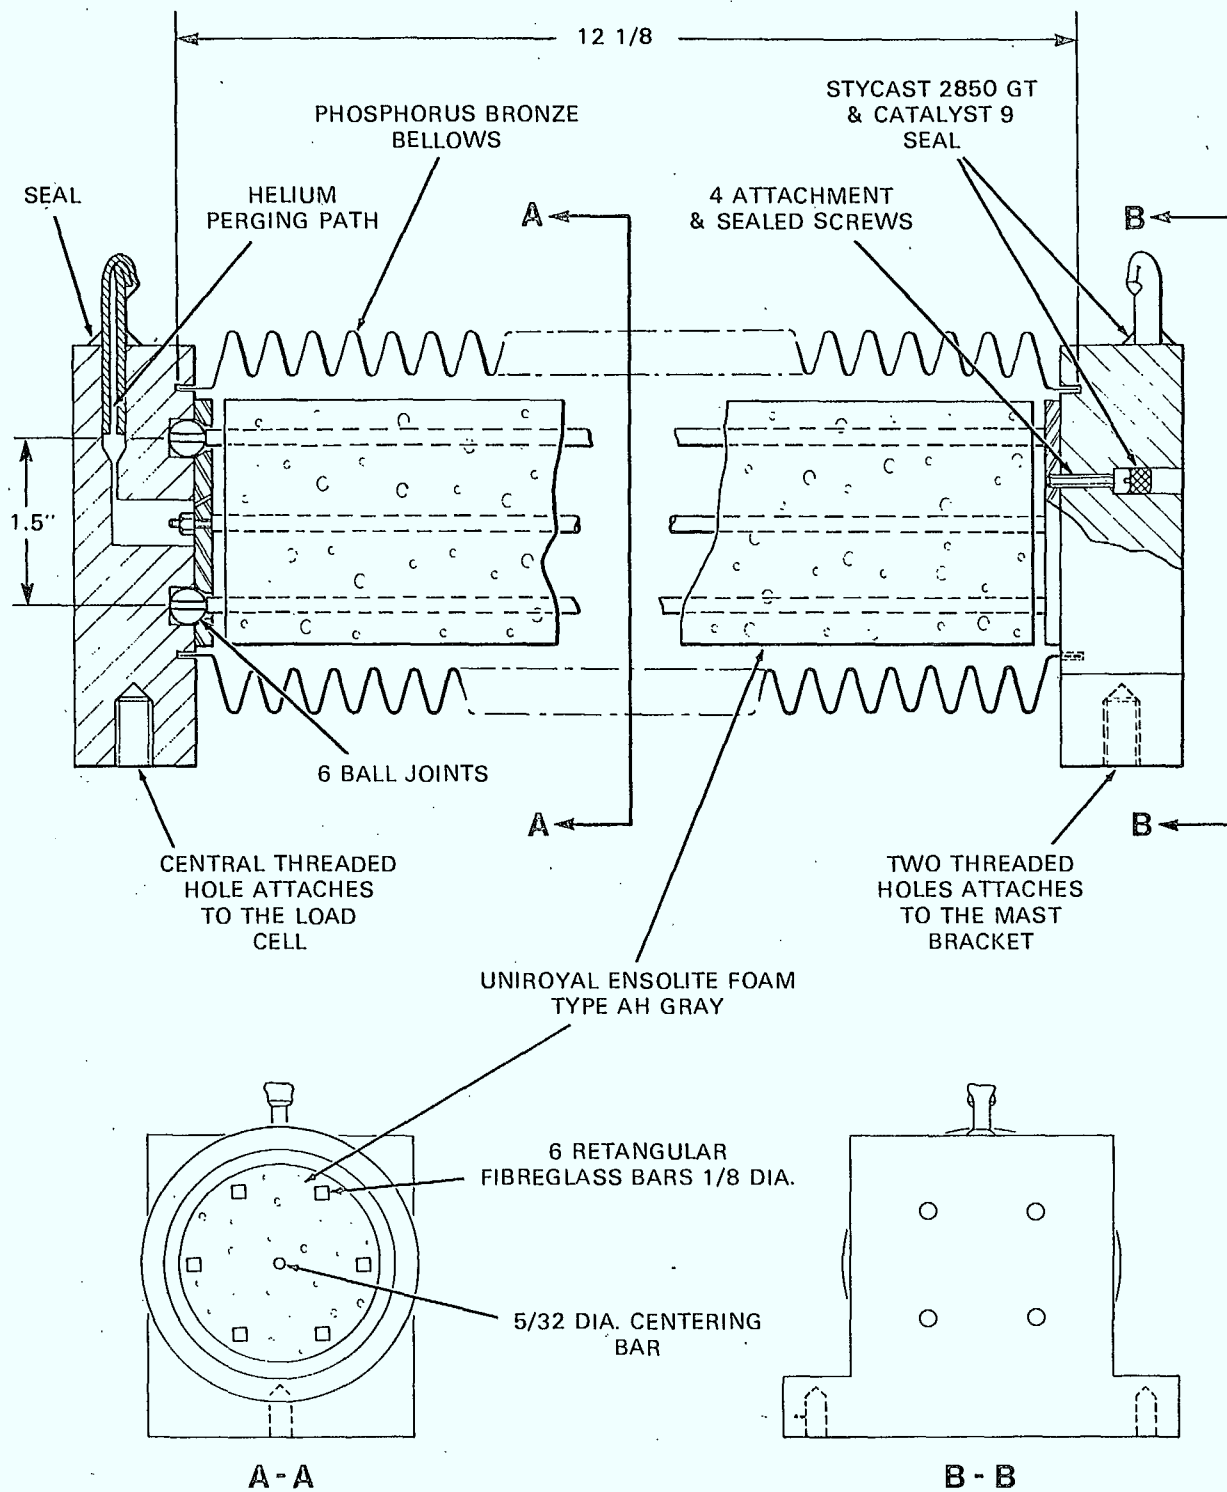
THE DAMPER ROD DESIGN
